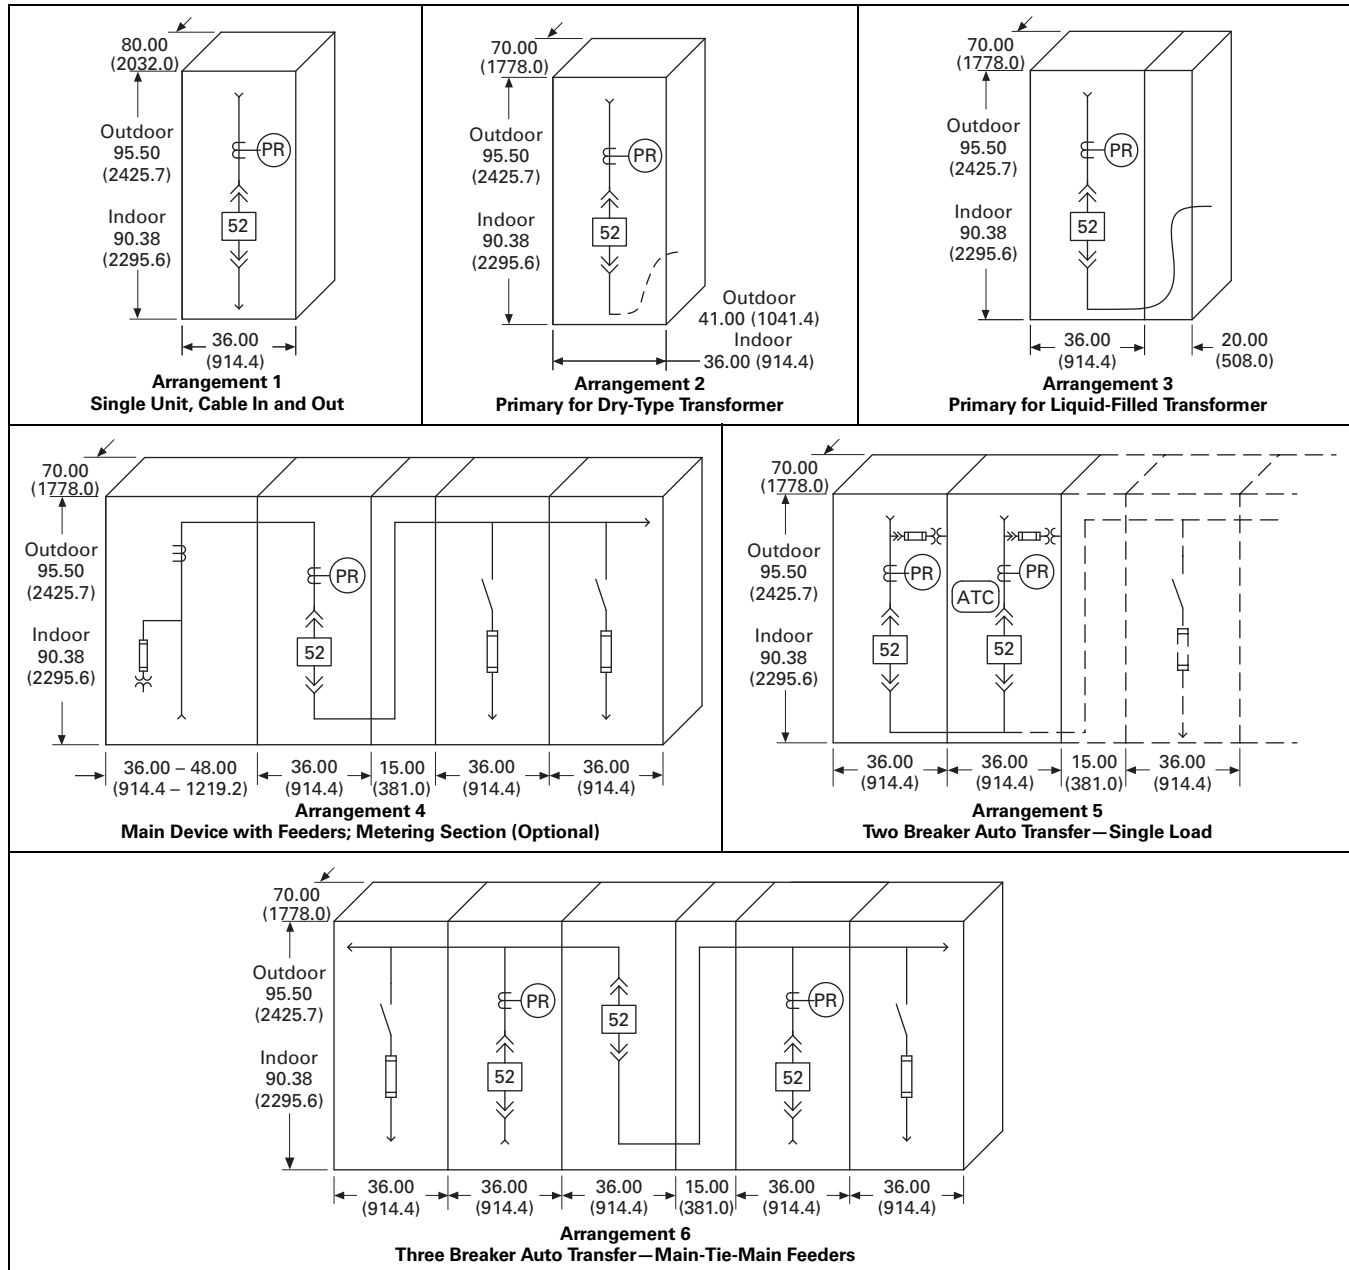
Layouts and Dimensions in Inches (mm)
